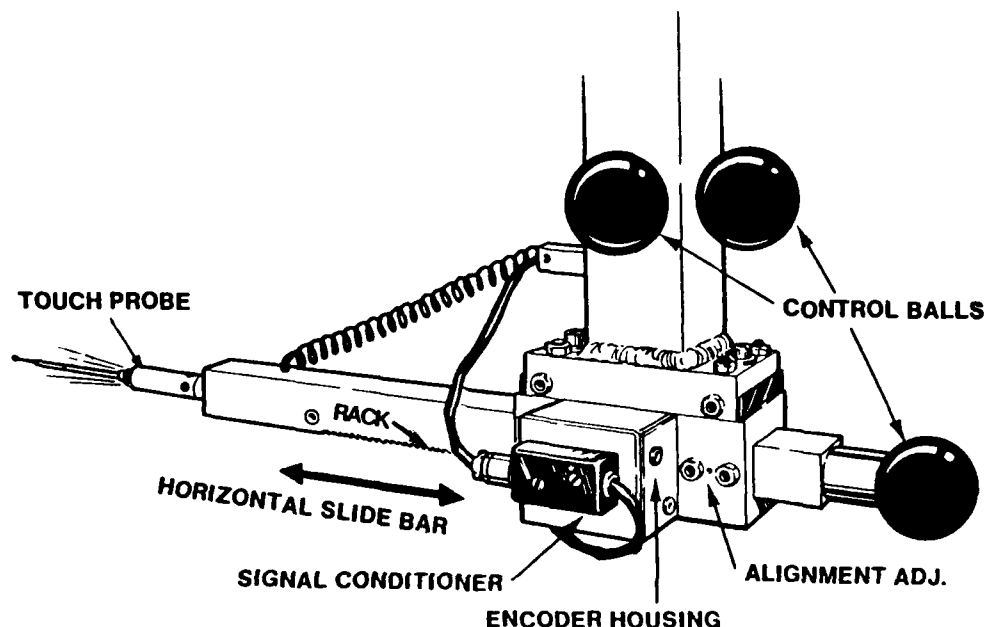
Horizontal slide assembly showing the touch probe and the measurement instrumentation.
